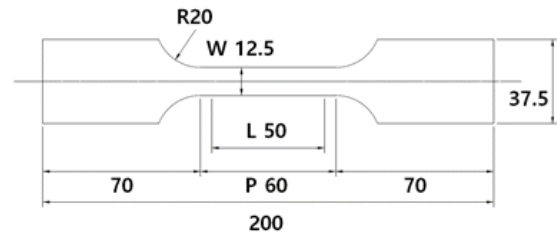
Dimension of tensile test specimens (KS B 0801 13type)
